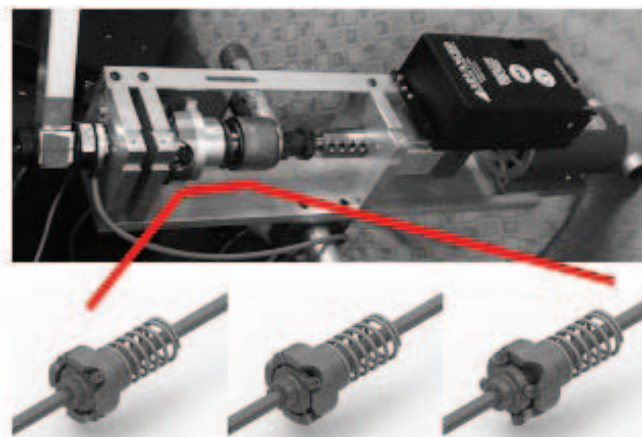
A close up of the robot internal components showing a custom compliant torque limiter (top). The compliant torque limiter is shown in three stages in the CAD drawing: Equilibrium, Transmitting torque and Over-torque (from left to right). The line indicates where the component appears.
